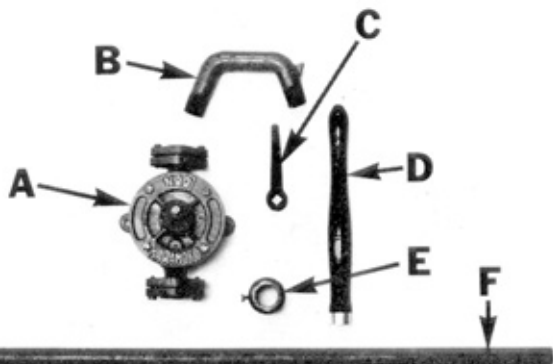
Monarch 2SR Semi-Rotary Hand Pump: (A) Pump Body, (B) Pump Spout, (C) Pump Handle Adaptor, (D) Pump Handle, (E) Bung Adaptor, (F) Suction Pipe..
